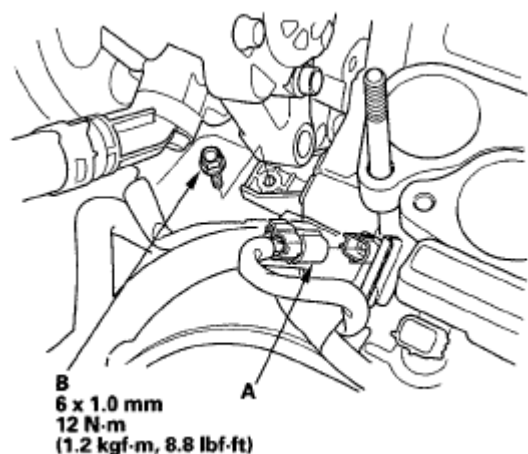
Identifying Knock Sensor Connector And Harness Bracket Mount Bolt With Torque Specification
